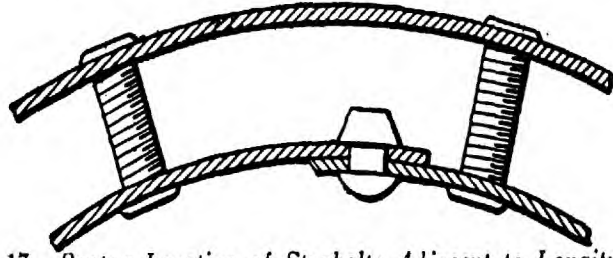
Proper Location of Staybolts Adjacent to Longitudinal Joint in Furnace Sheet.
